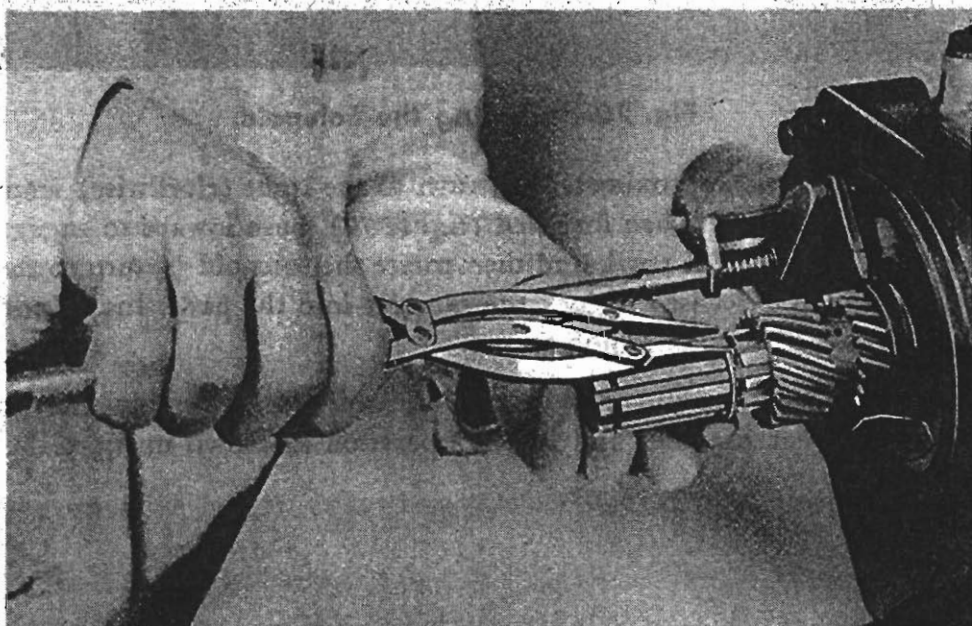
Install the Reverse Plunger, Shift Rail and Shift Fork Assembly.
